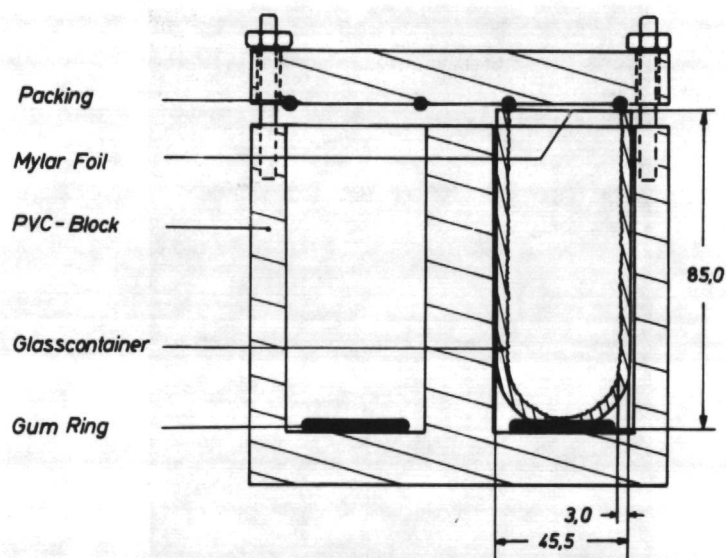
Schematic Presentation of the Apparatus Used for the Grinding Technique
